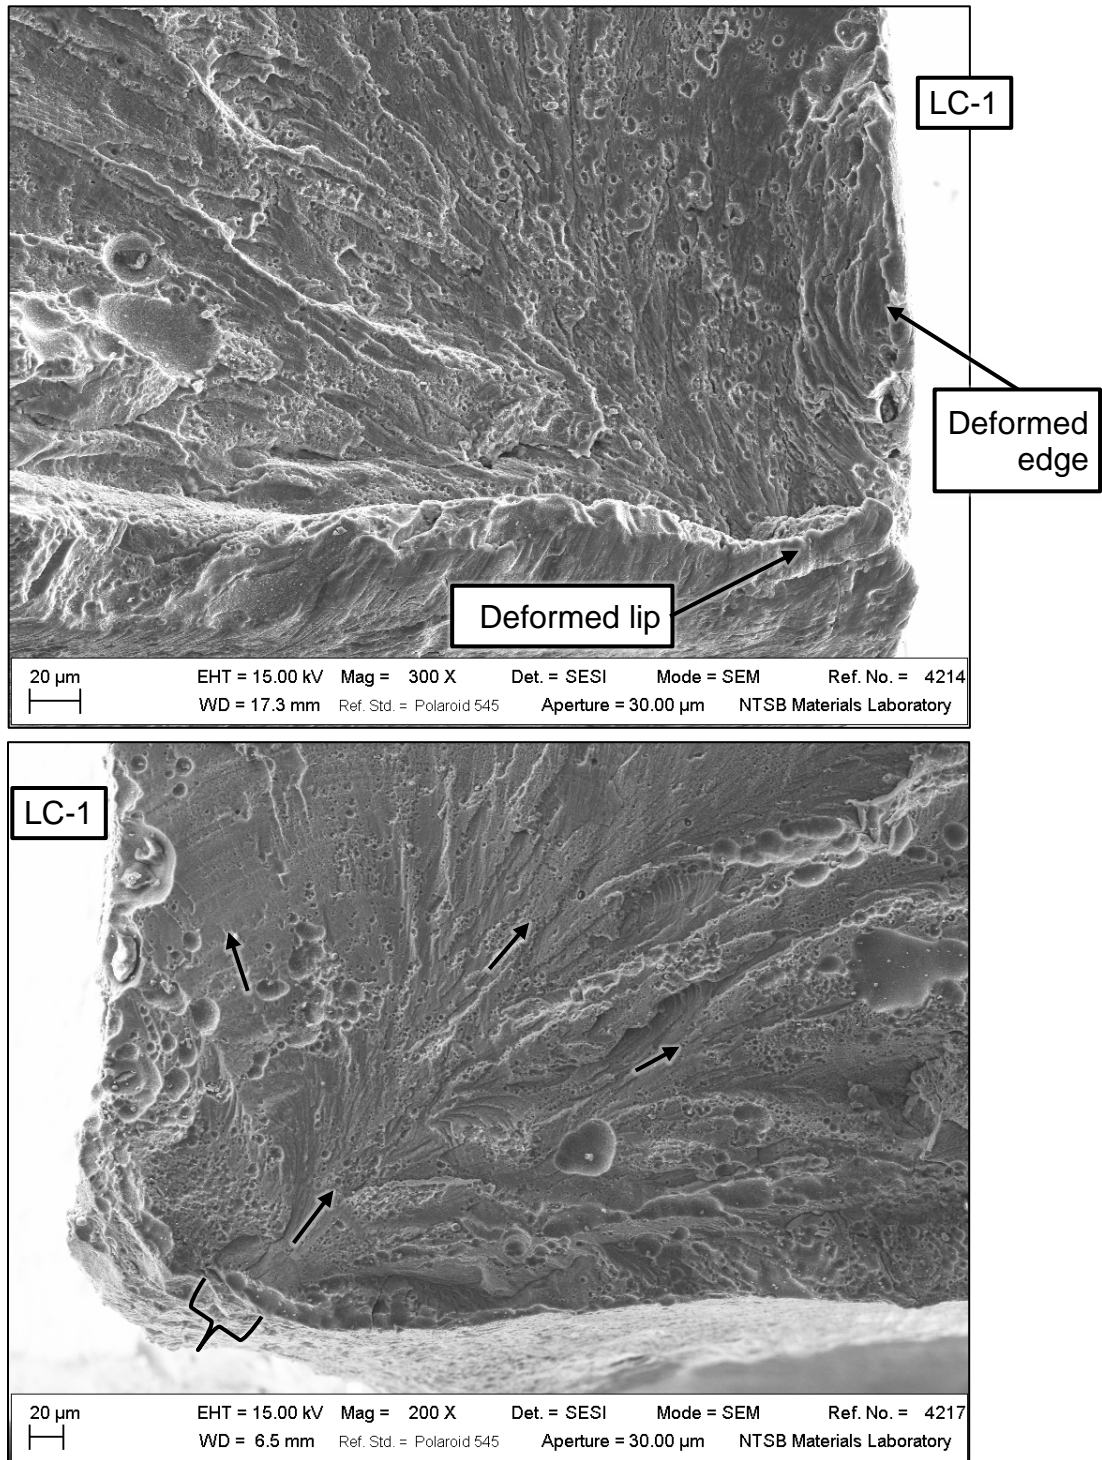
SEM images of mating fracture surfaces at the aft side of hole LC-1 showing the outboard side (upper image) and the inboard side (lower image) of the fracture after each surface had been chemically cleaned. An unlabeled bracket indicates the location of the origin area (identified with an unlabeled bracket) on the inboard side of the fracture which was damaged on the mating outboard side. Unlabeled arrows indicate local directions of crack propagation.
